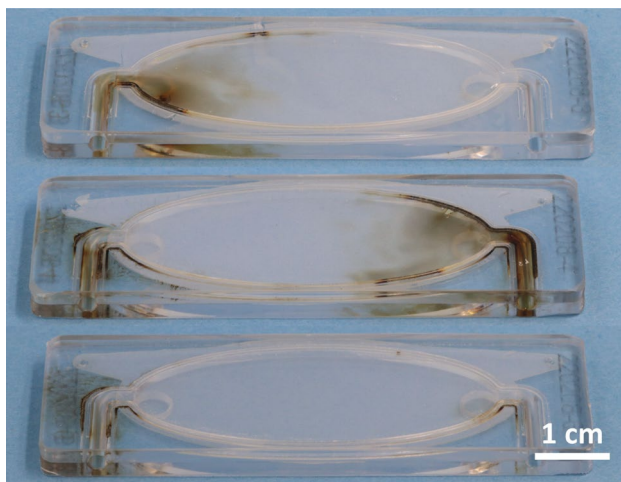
Exemplary outcomes of MBR assembly using laser transmission welding. Identical laser parameters were applied. Various burns occurred during the welds at different locations. The region around the channel corners was burnt in several laser beam passes, however, it was not the only position where burns occurred, nor did these regions get burnt every time a burn developed.
